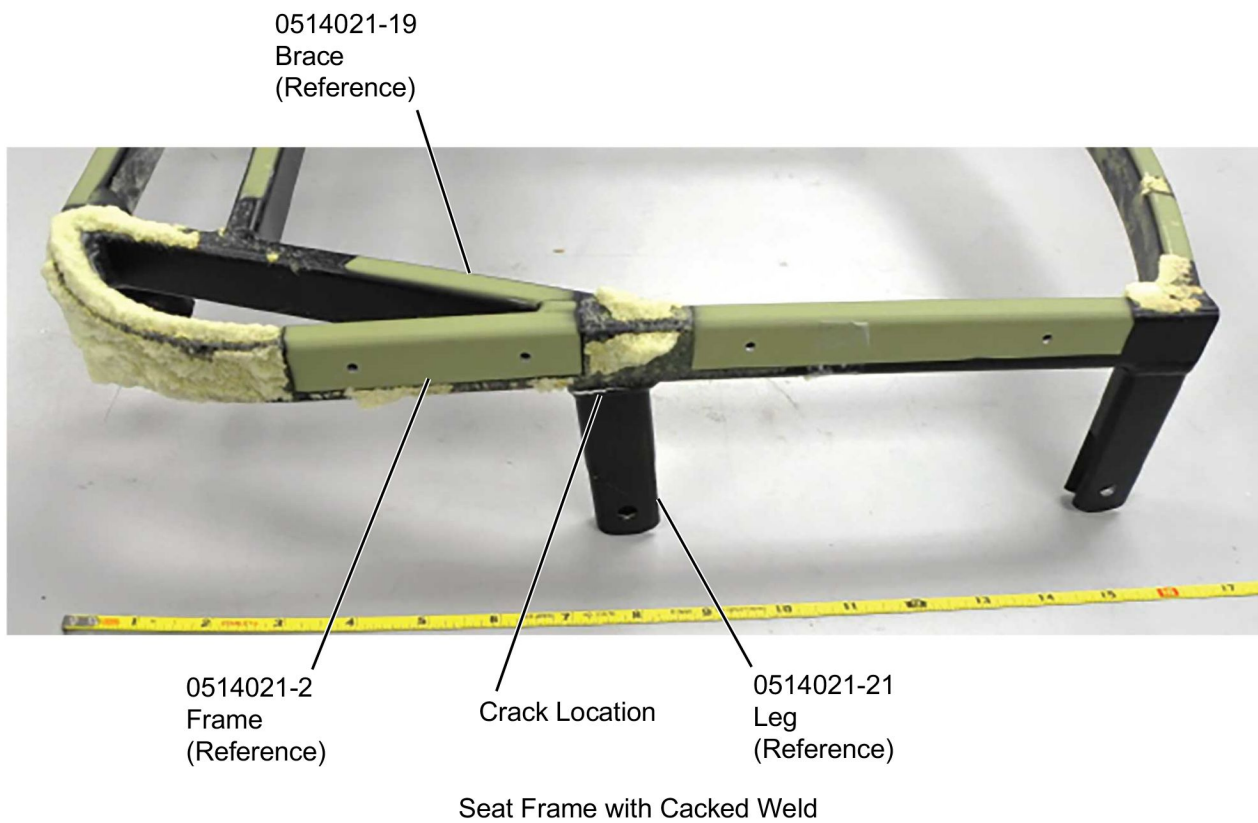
Seat Frame Crack and Weld (Sheet 1)
